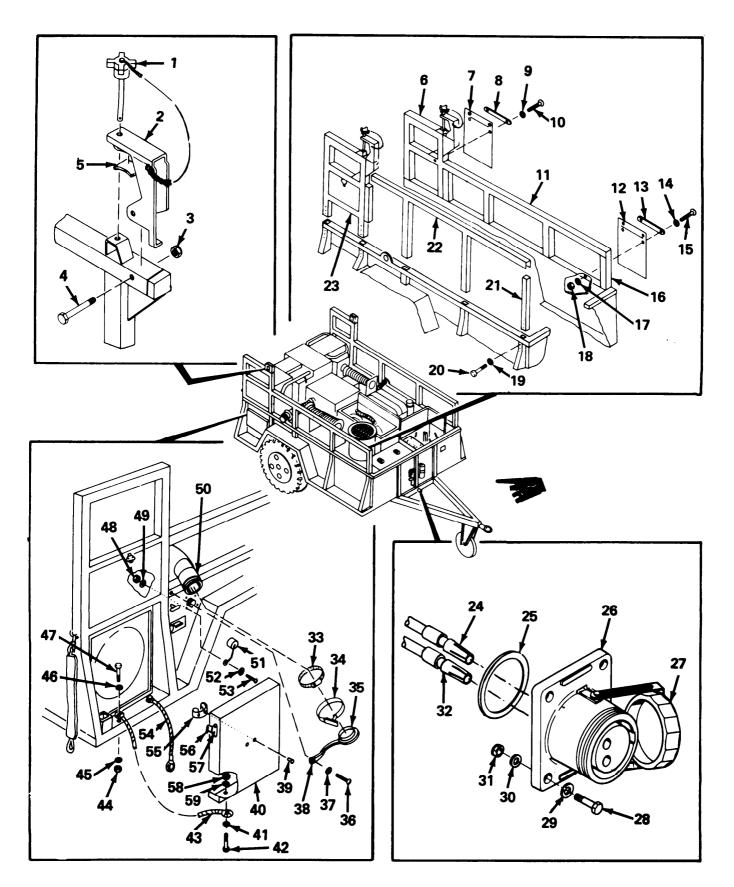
Miscellaneous trailer-mounted equipment, exploded view.
